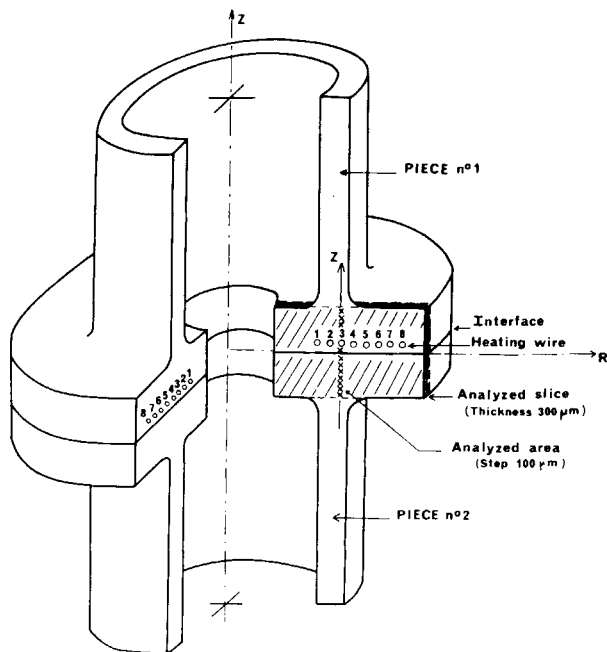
Test piece (after welding) showing analyzed sample.
